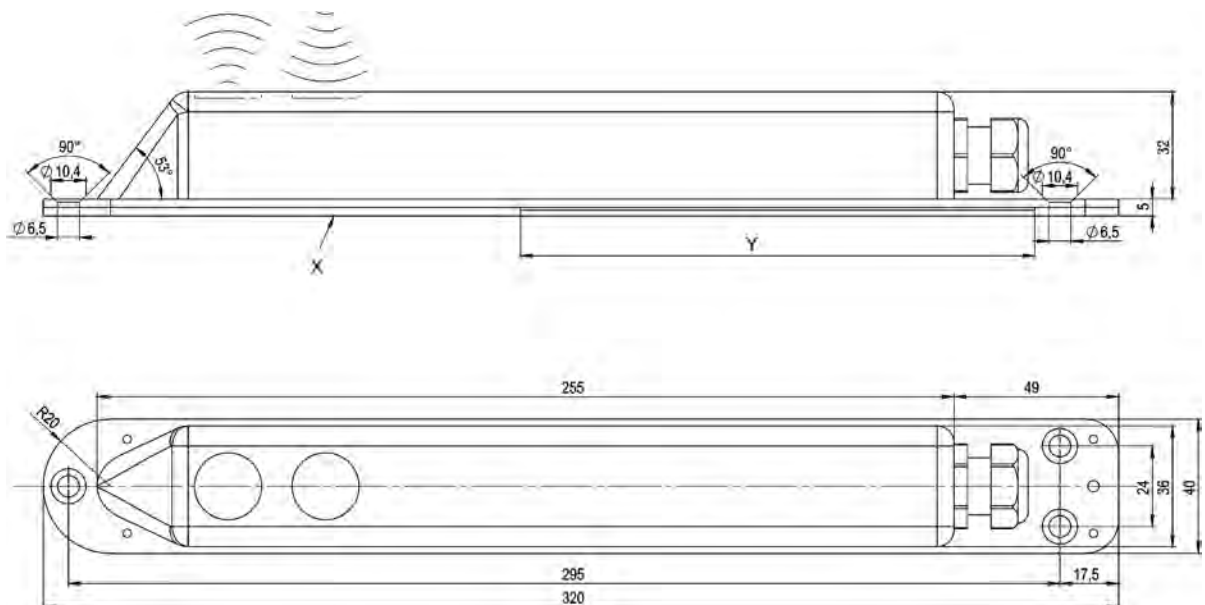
Dimensioned drawing Sensor POA-V300R
